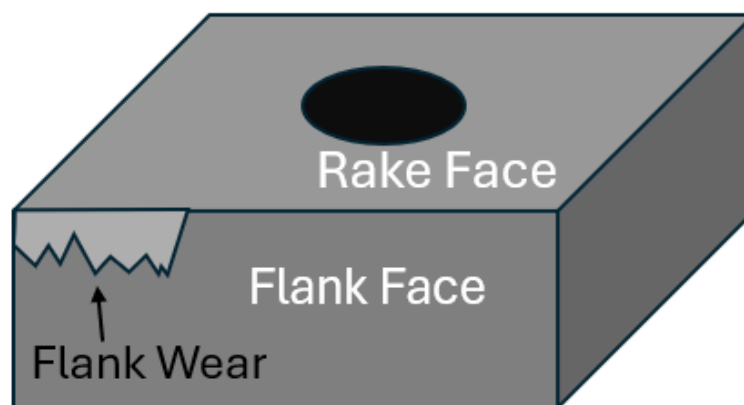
Schematic illustration of a cutting tool with flank wear
